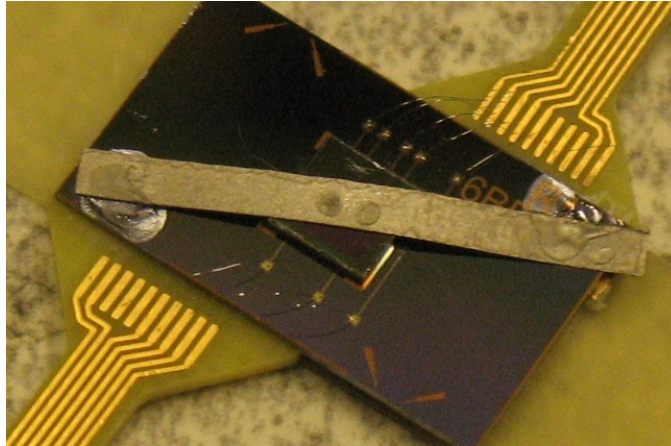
Close view image showing the clamped/bonded mechano-optical modulator with wirebonds connecting the optical chip to the PCB and metal glued on mechanical chip to hold it in position
